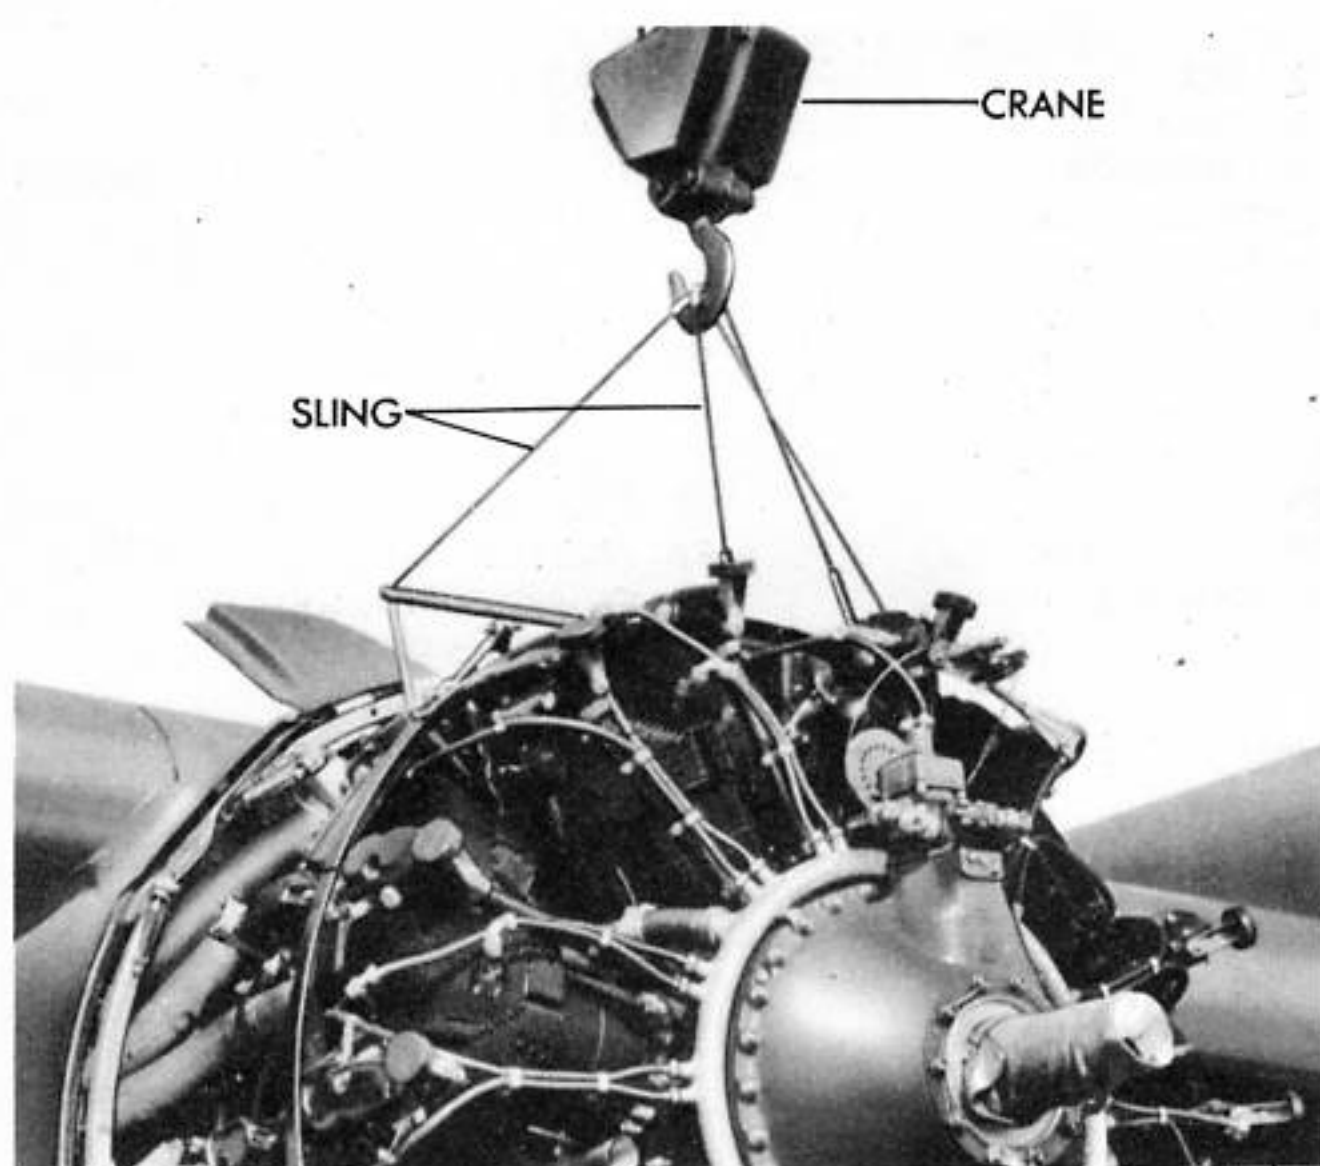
CRANE ENGAGED FOR ENGINE REMOVAL
